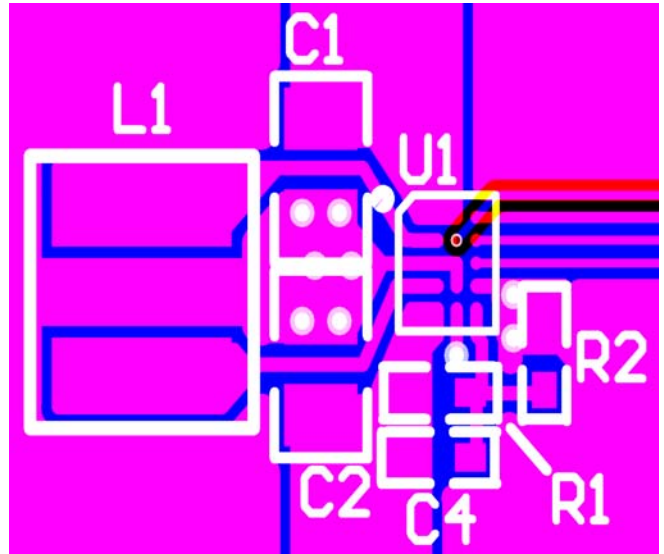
RECOMMENDED ISL9110AITAZ PCB LAYOUT
